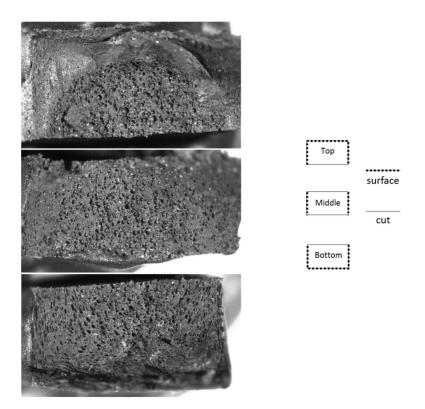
Stereomicroscope pictures of MatA S1 fracture surfaces: top, middle and bottom.
